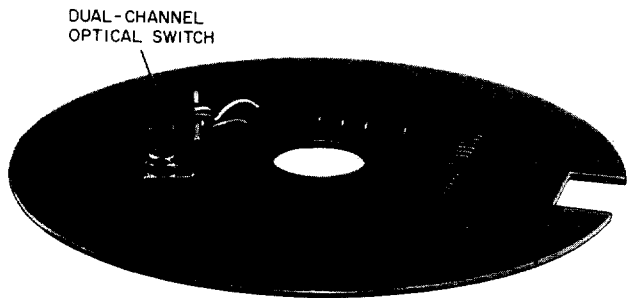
L-509855-2 Optical Switch Assembly—Used With KS-20951, L2 DSUs Serial No. 9 and Up
